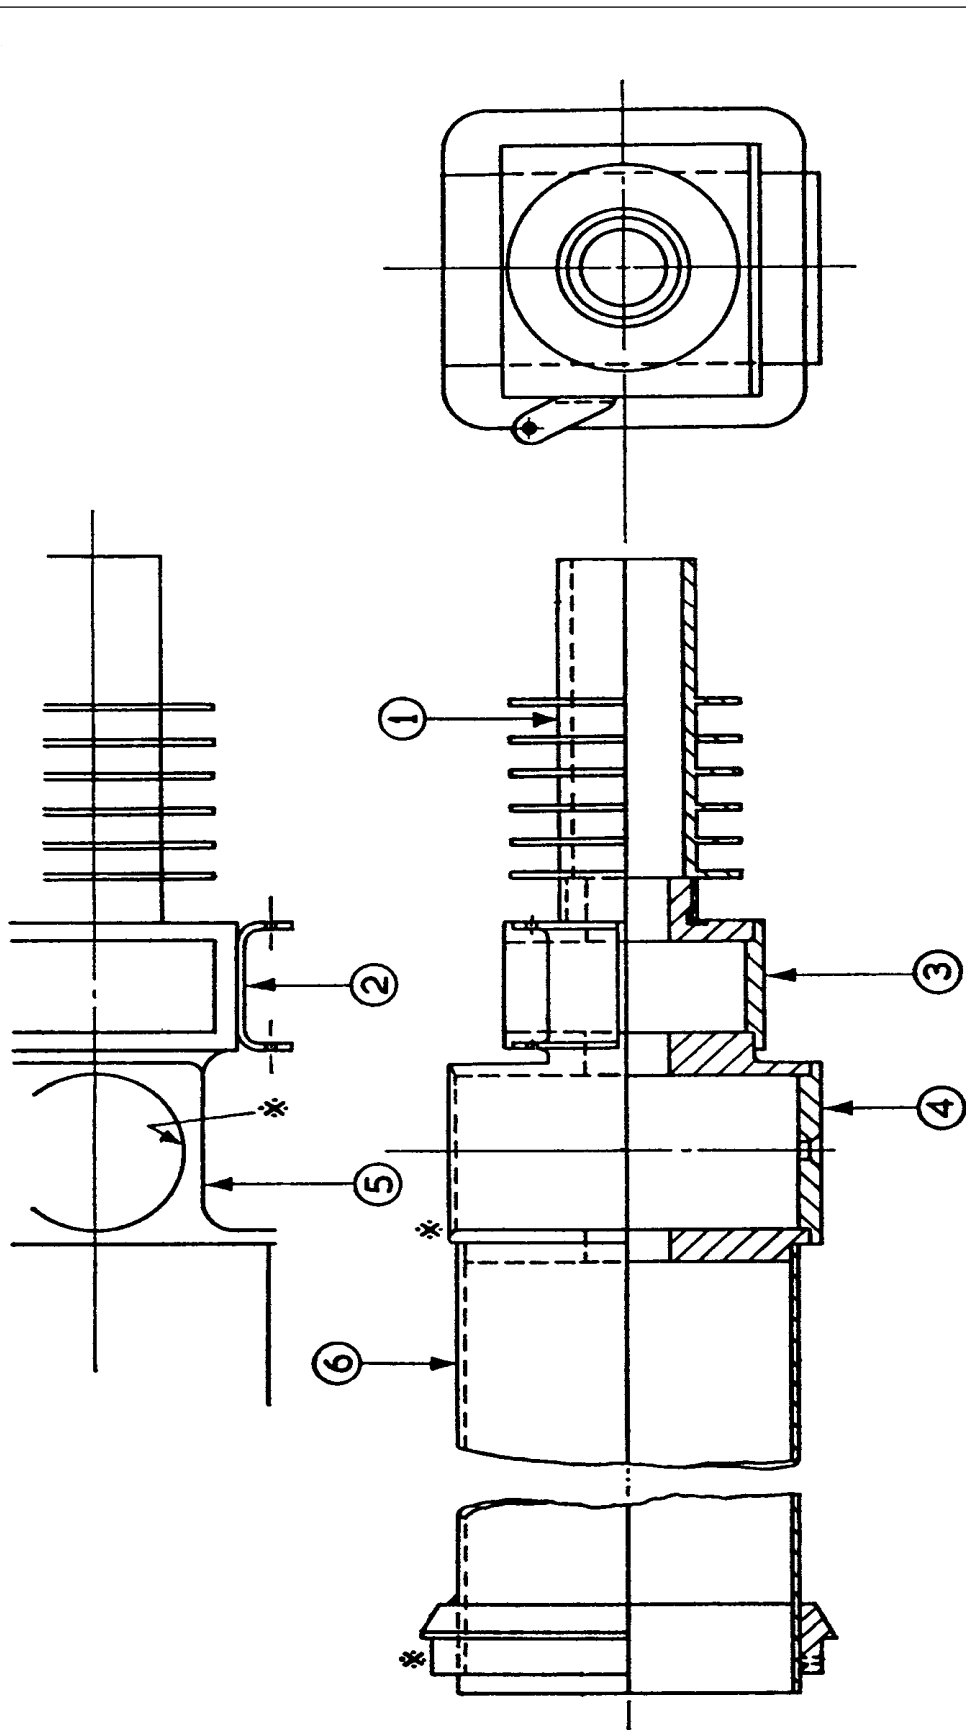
Photomultiplier, test tube and flame tube assembly (continued)
